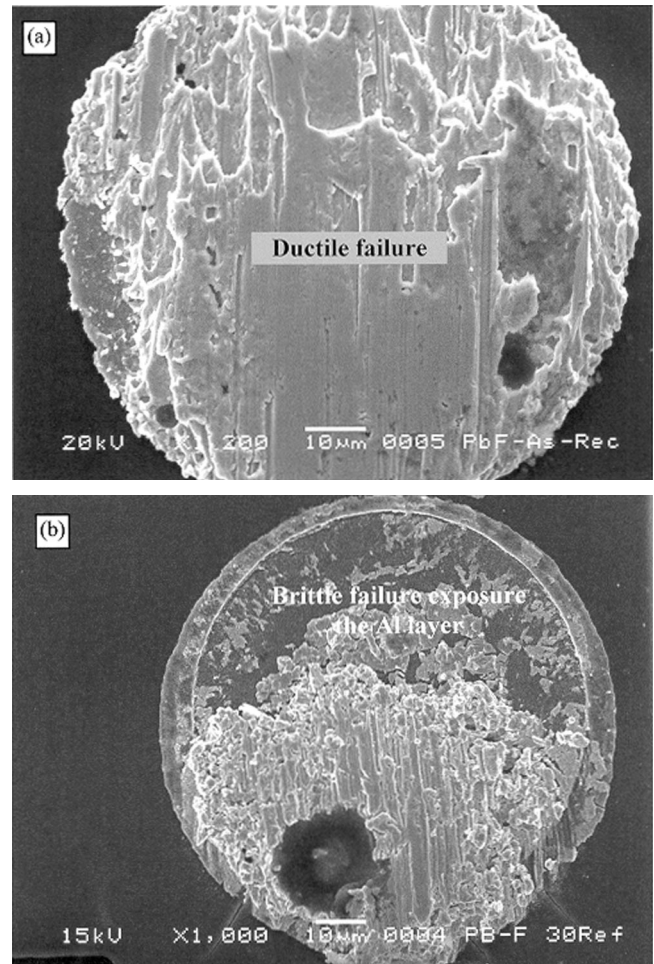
The fracture surfaces of SnAgCu solder joints after (a) 1 reflow and (b) 30 reflows at 260°C.
